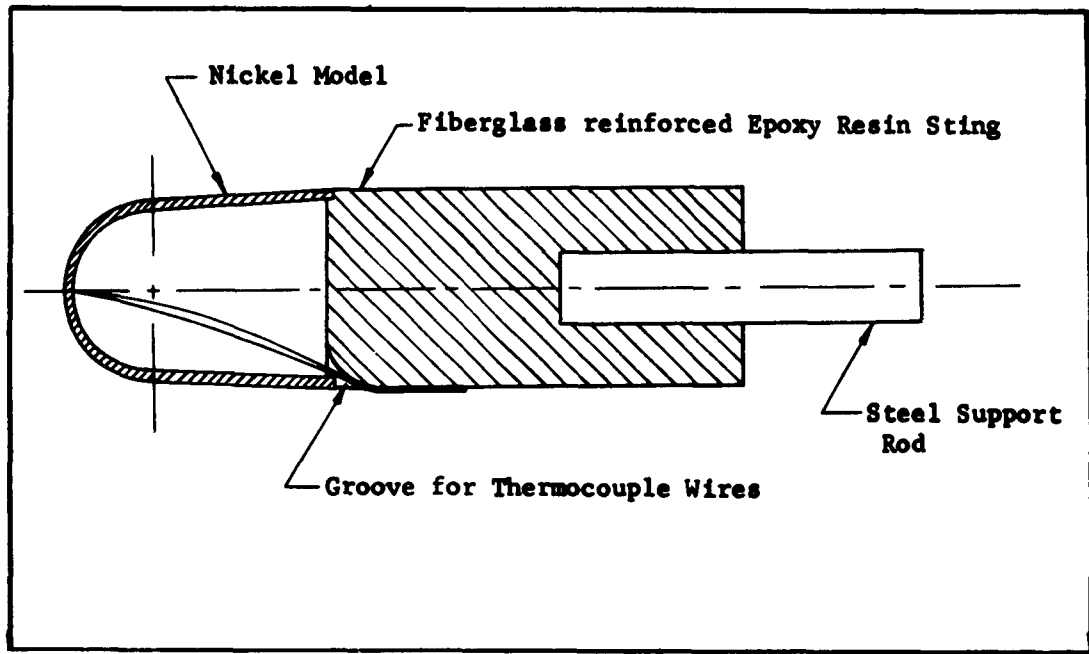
A. SECTIONAL DRAWING OF HEAT TRANSFER MODEL
